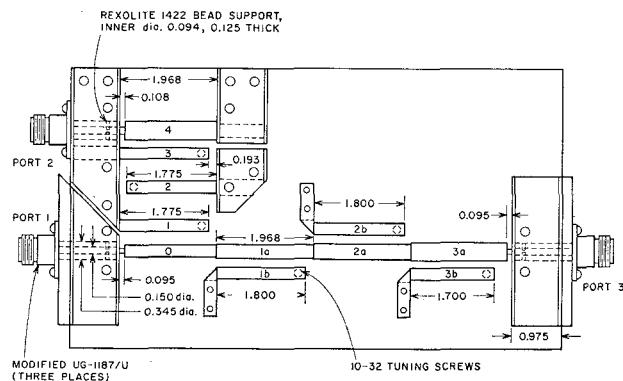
Drawing of the trial multiplexer channel unit in strip line.
